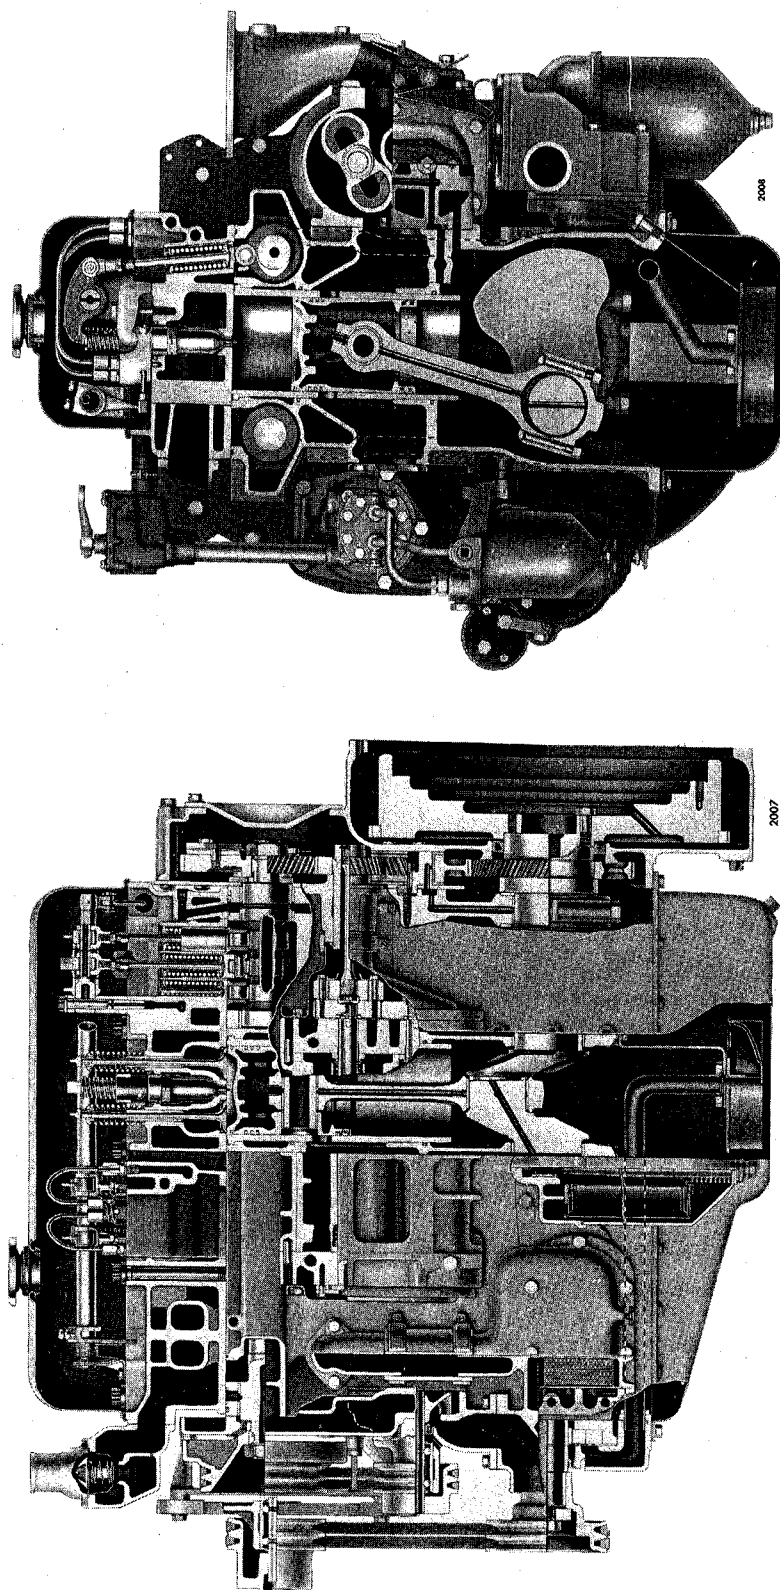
Cross Section Views of a Typical In-Line Engine
